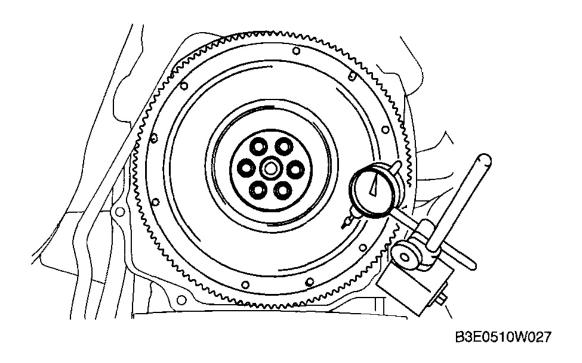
Measuring Flywheel Maximum Runout Using Dial Gauge Courtesy of MAZDA MOTORS CORP.
